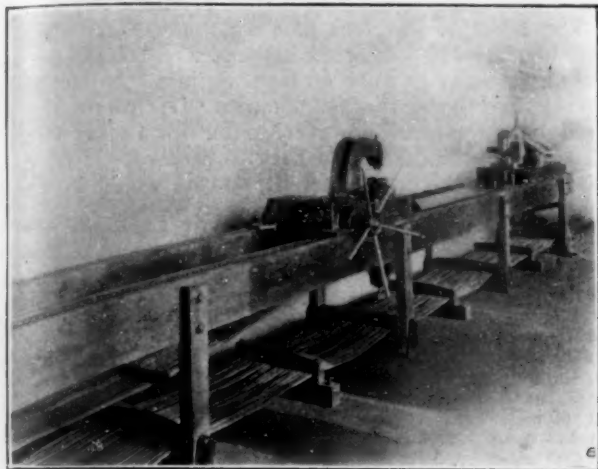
SNEAD HB-4 MACHINE, REAR END
